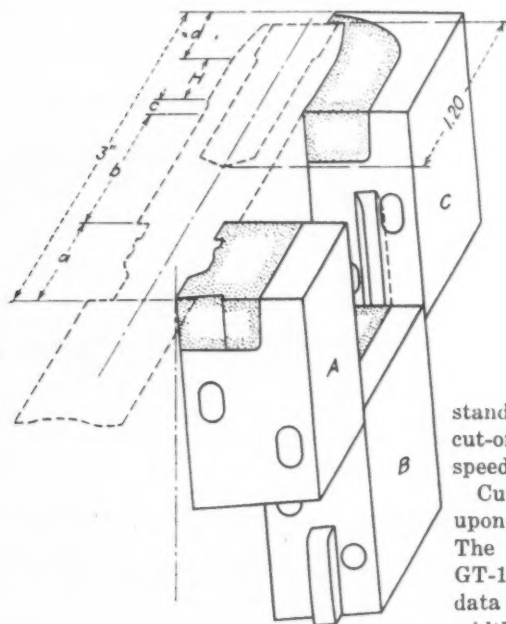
Exploded view of a three section broad carbide forming tool. Each section may be adjusted separately for wear.
